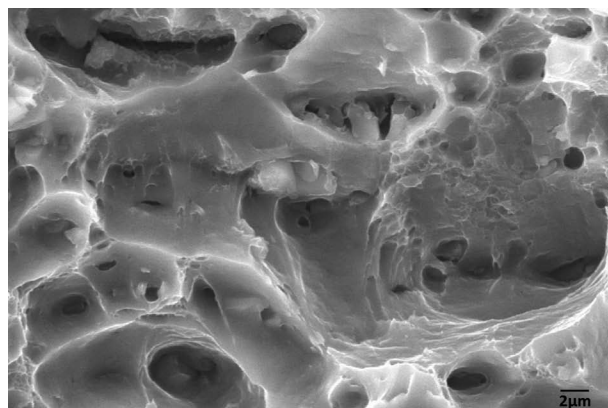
Higher magnified image of the fracture surface shown in Fig. 102
